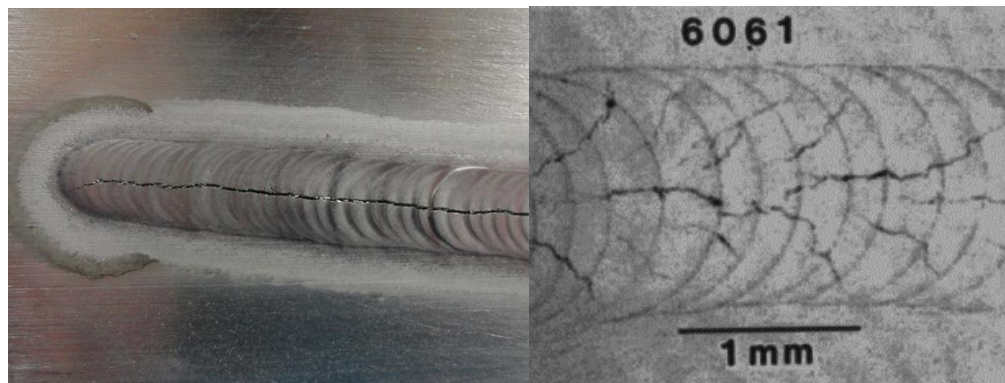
Solidification cracking observed in GTAW (TIG) weld of AA6061 [251] and exhibited on laser welded AA6061 plates [252]
